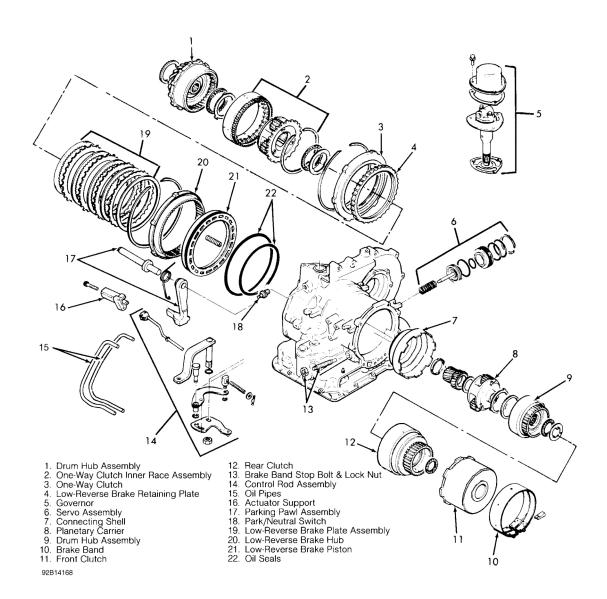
Exploded View Of Transaxle Housing & Primary Components Courtesy of FORD MOTOR CO.
